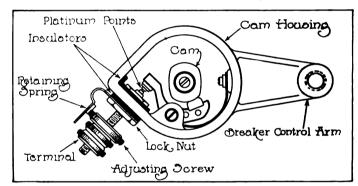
Showing the Components of Circuit Breaker and Members Utilized in Making Adjustments—The Break May Be Regulated with the Motor Operating.
